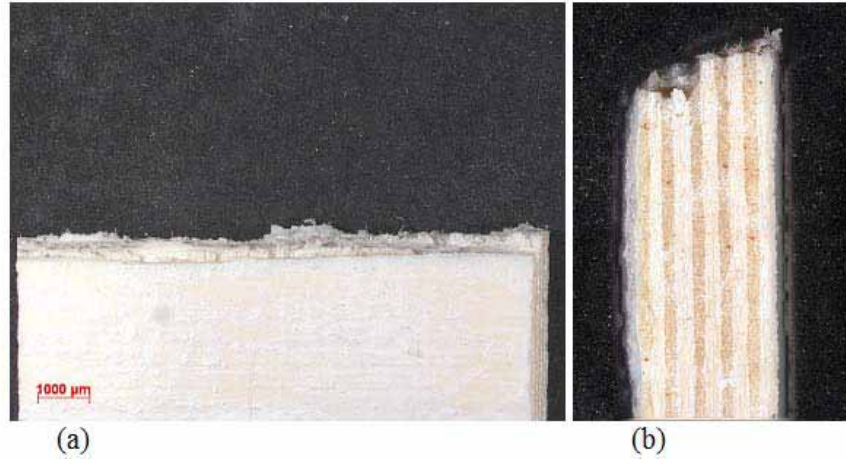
Fracture surface of C1 composite specimen tested in tension to failure at 1100 °C in laboratory air: (a) front view and (b) side view.
